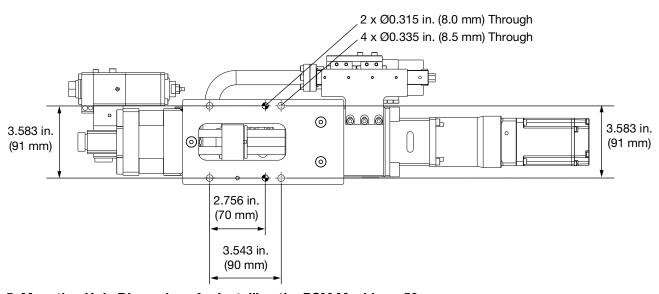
Mounting Hole Dimensions for Installing the PSM Machine - 50cc
